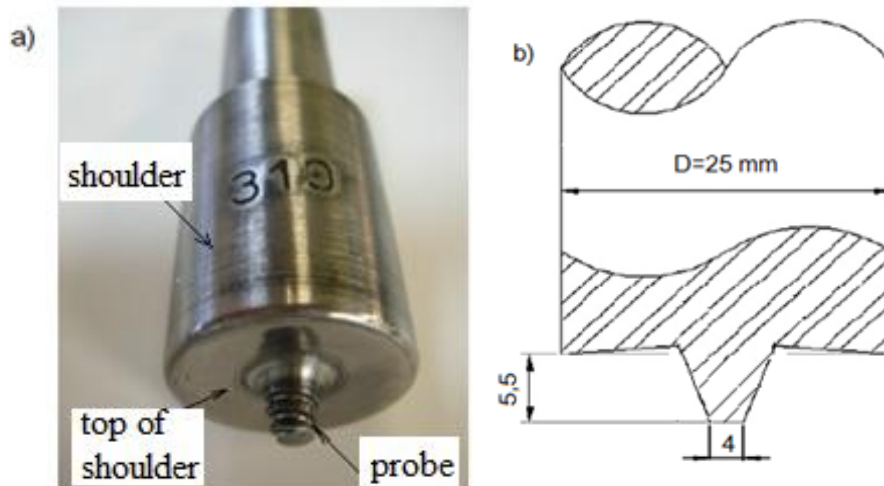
23 a) Photo of the tool with basic elements, and b) the part of schematic drawing of welding tool with basic dimensions
